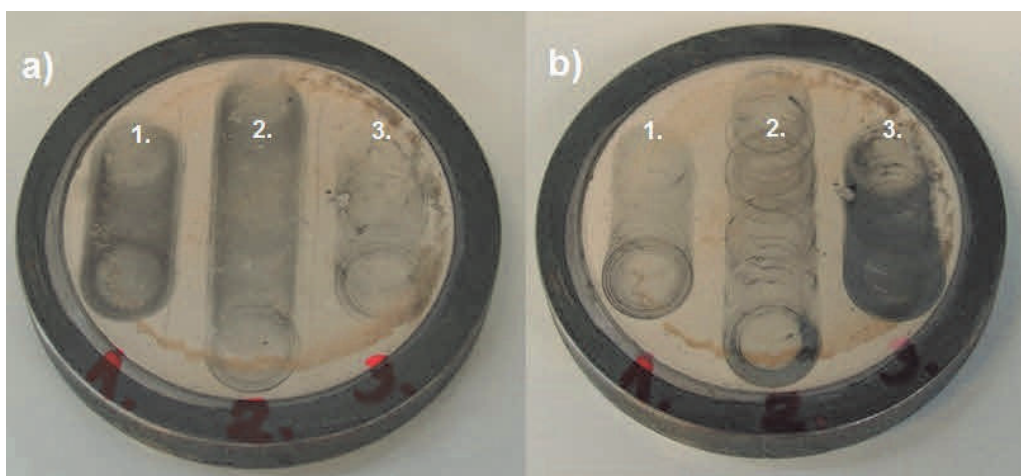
Samples made with Prototype 1 tool, a) change of tool speed, b) change of tool feed speed
